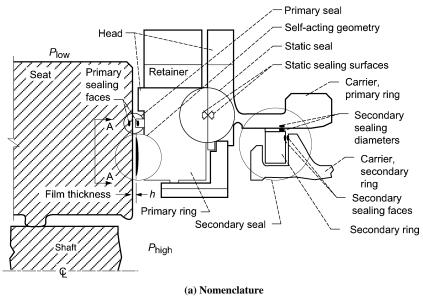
Component schematic Rayleigh pad self-acting face seal. 109
